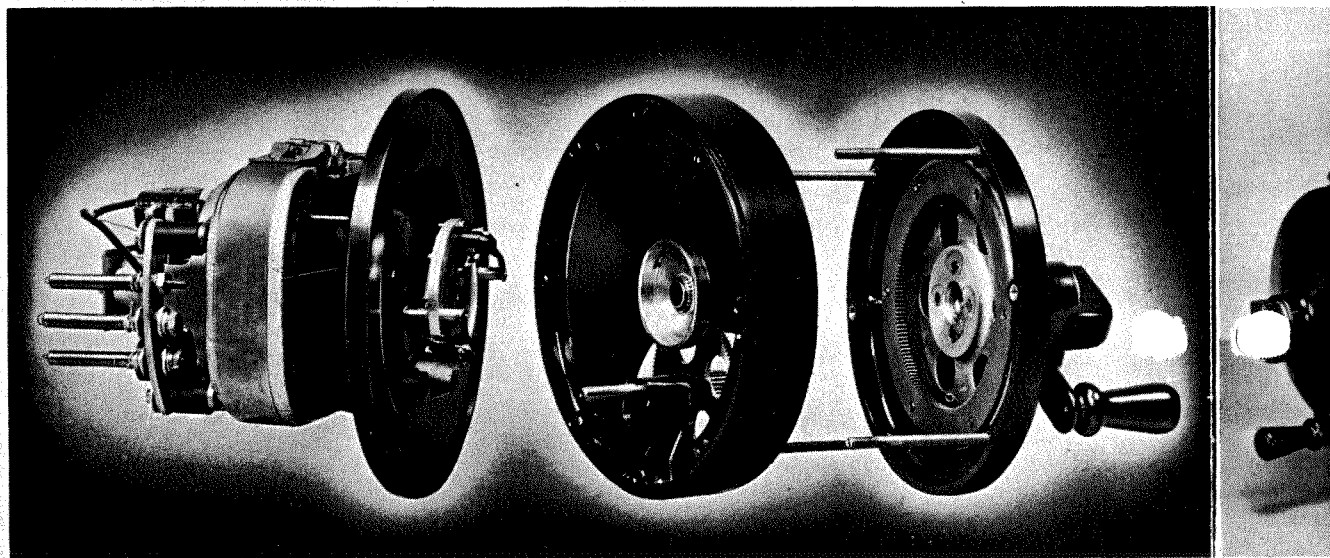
Direct-current magneto generator, centrifugal clutch mechanism and driving gears.
